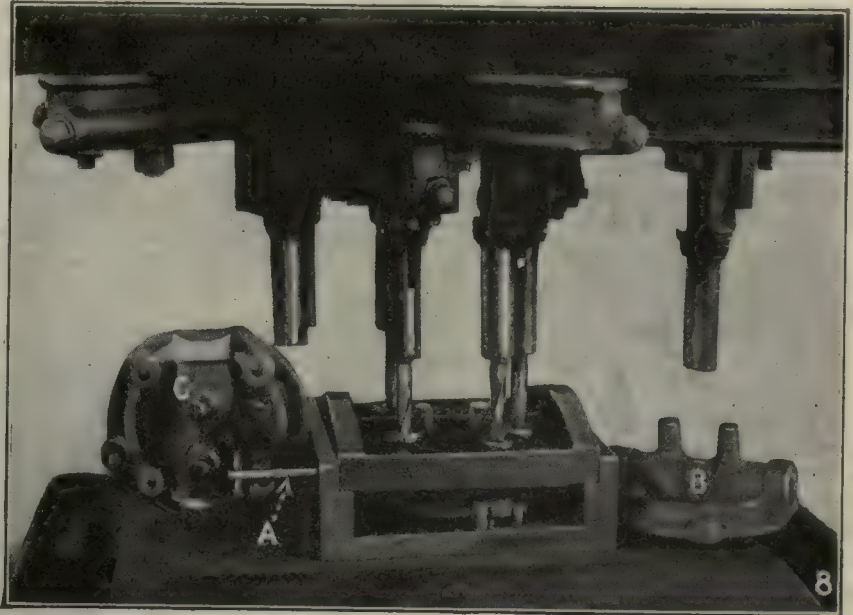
MULTIPLE DRILLING ON CYLINDER HEAD
